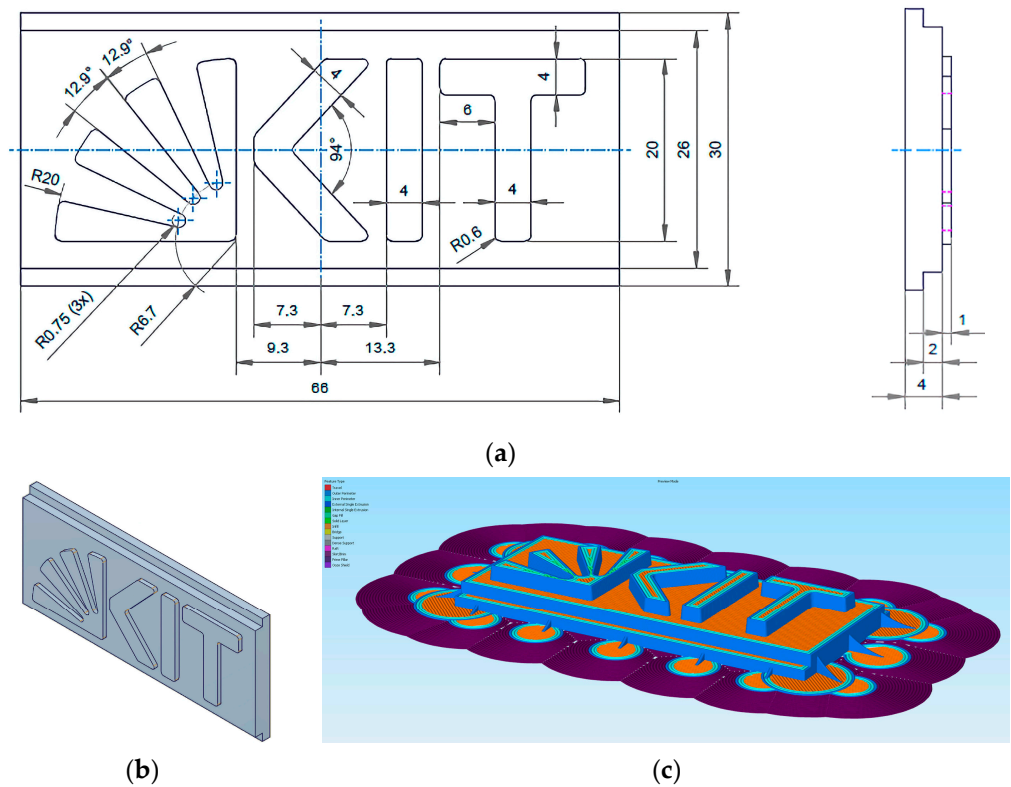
Mold insert type 1: (a): Engineering drawing with unit mm; (b) 3D view; (c) used STL File.
